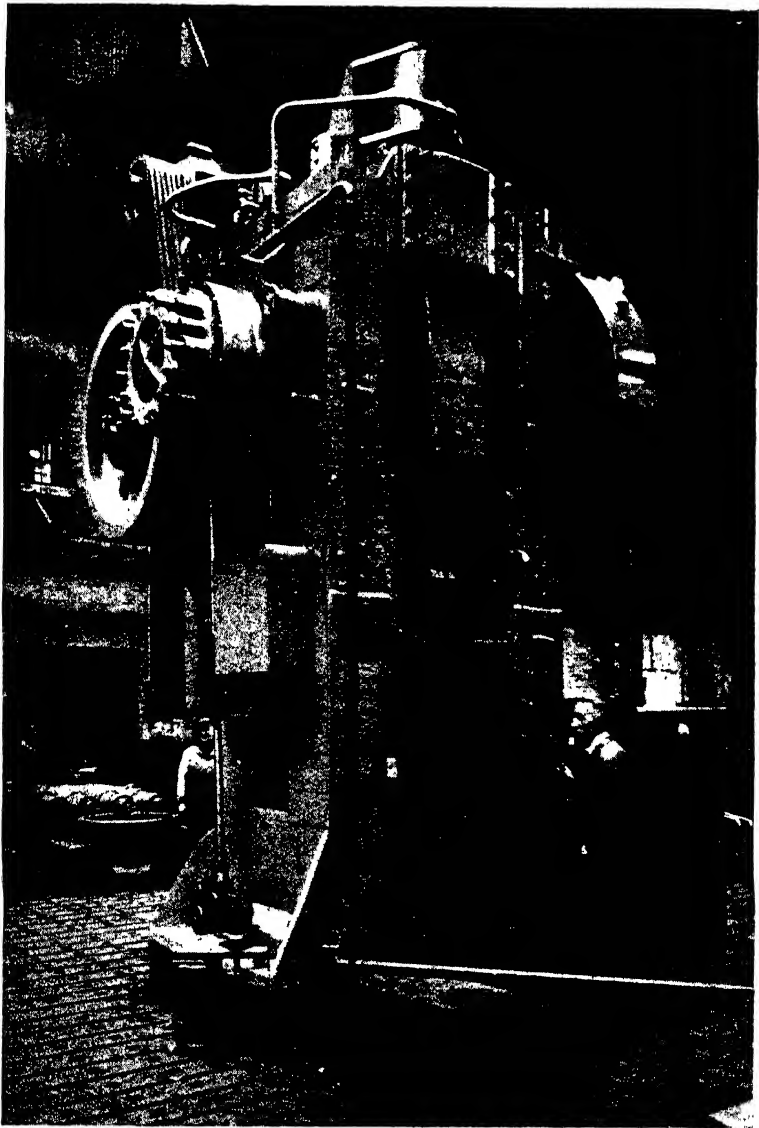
FRONT VIEW OF THE EUMUCO "MAXIMA" 1,000-TON HIGH-SPEED FORGING PRESS
